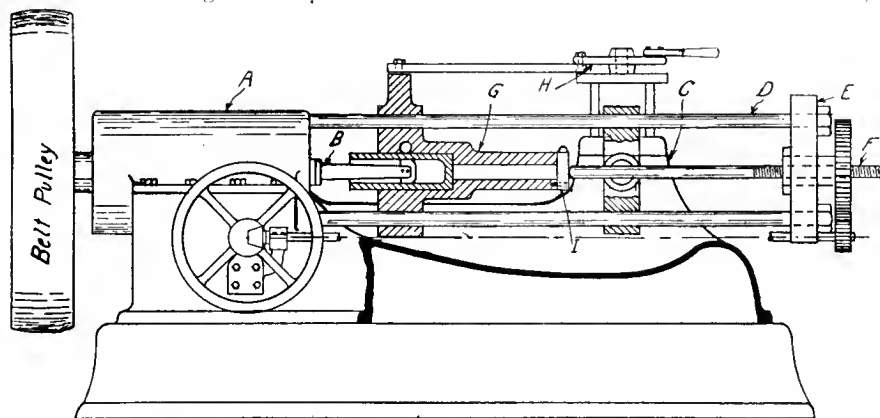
SHELL BORING MACHINE BUILT FROM GASOLINE ENGINE PARTS.
